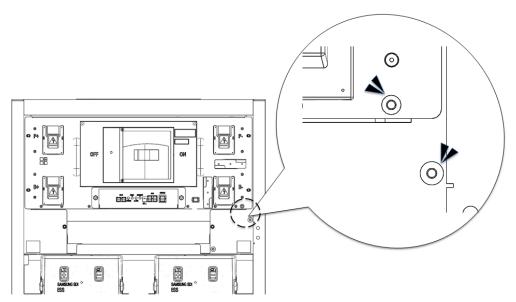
Ground Cable Connection to the Switchgear Assembly
